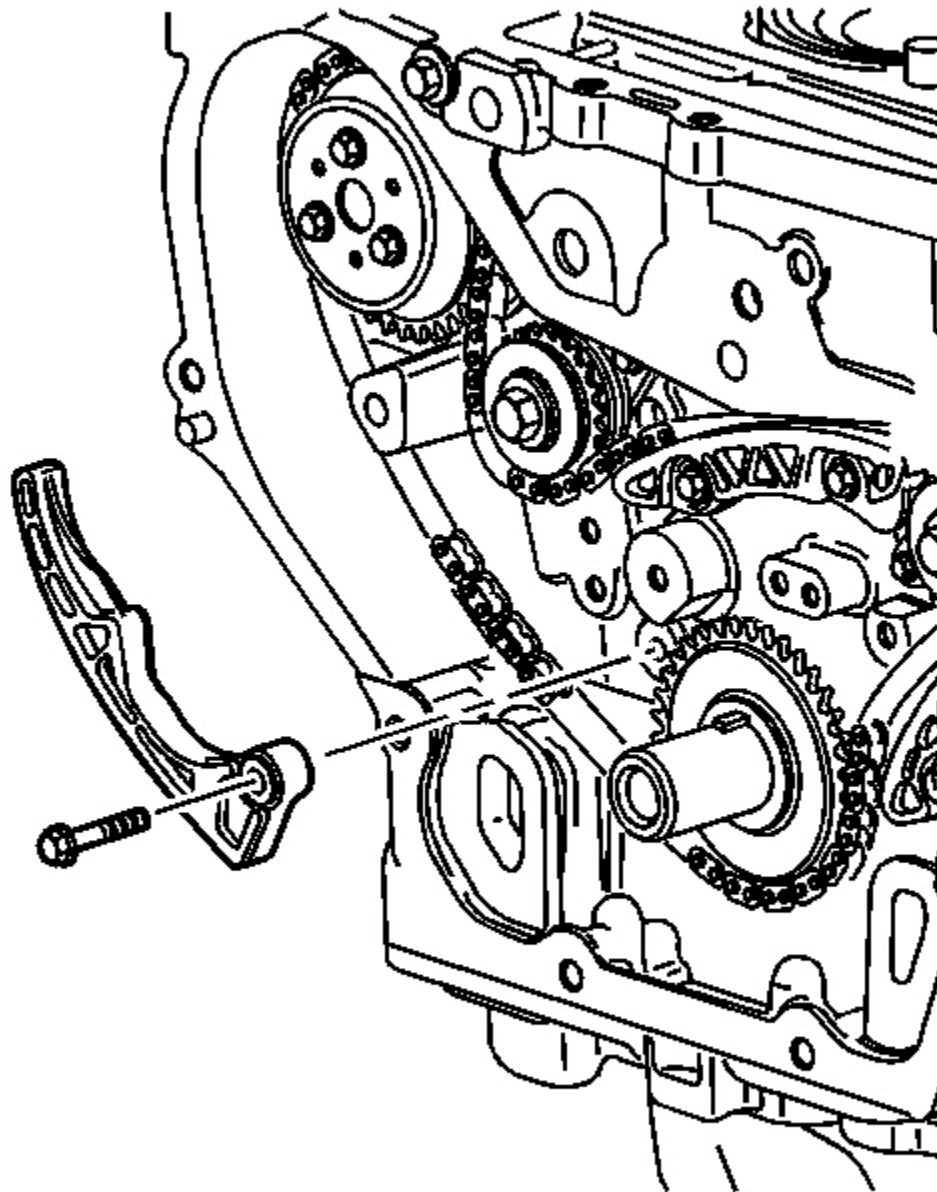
View Of Adjustable Balance Shaft Chain Guide
